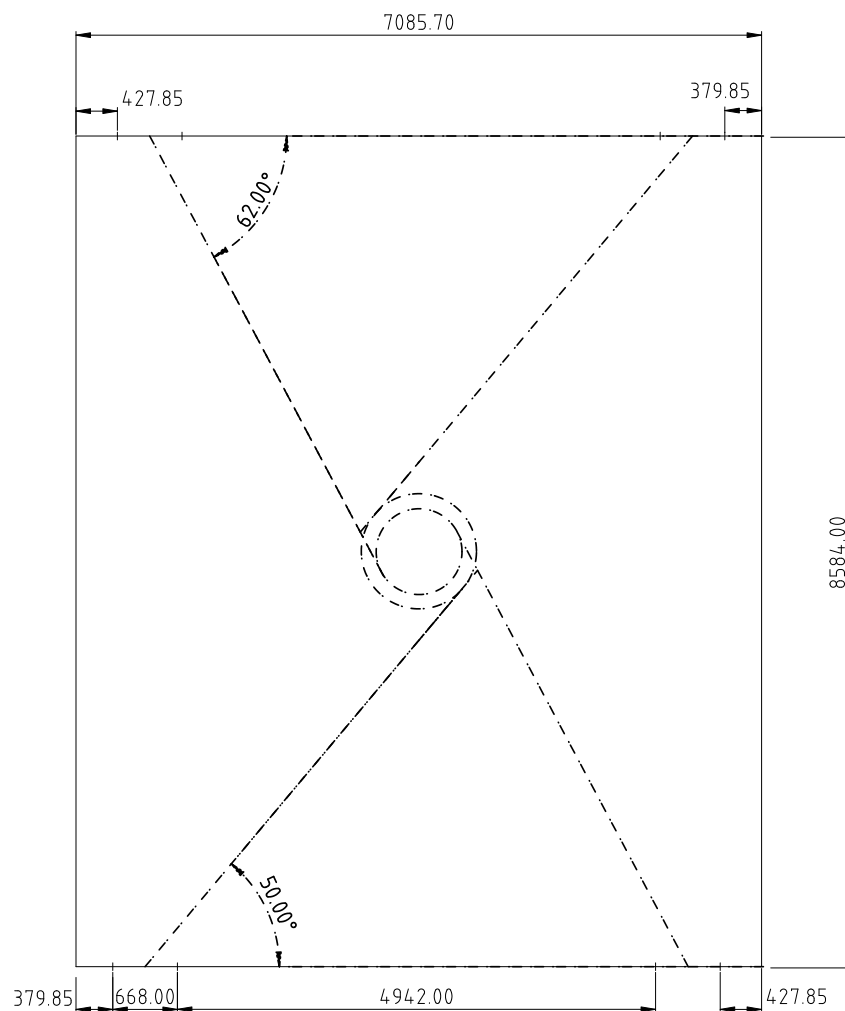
Sketch of a technical drawing representing the boiler base on the plane X-Z evidencing the inlet angles. Dimensions in mm.
